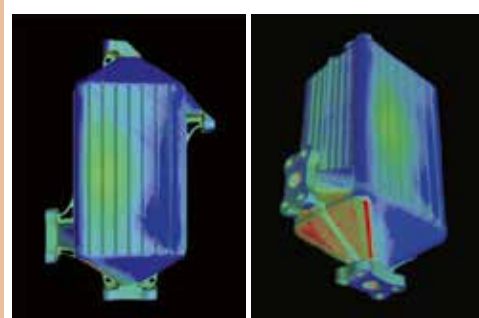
The dimensional control can be carried out with a 3D test scan for the external dimension
